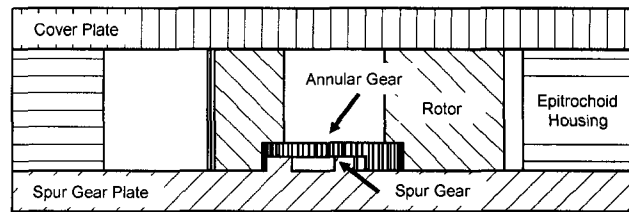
Cross-section of the MEMS rotary engine design (shaft not shown).
